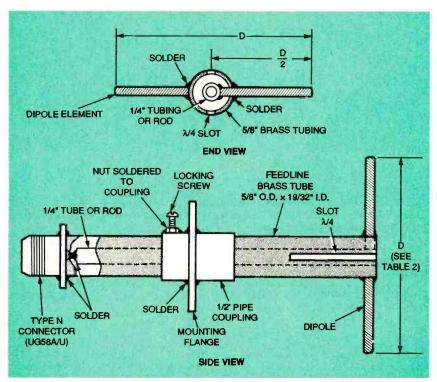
TWO VIEWS OF THE DIPOLE AND FEEDLINE construction details. In the end view drawing note that the right dipole element connects to the inner and outer tubes and shorts them together. The left dipole element connects just to the outside tube. The ends of both dipole elements are equi-distant from the center of the inner tube.
